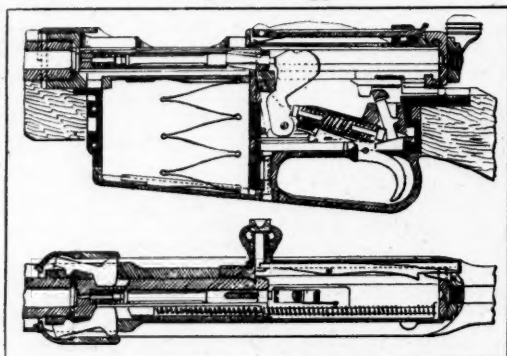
VERTICAL AND HORIZONTAL SECTIONS OF THE MAUSER GUN, WITH THE BREECH CLOSED.
